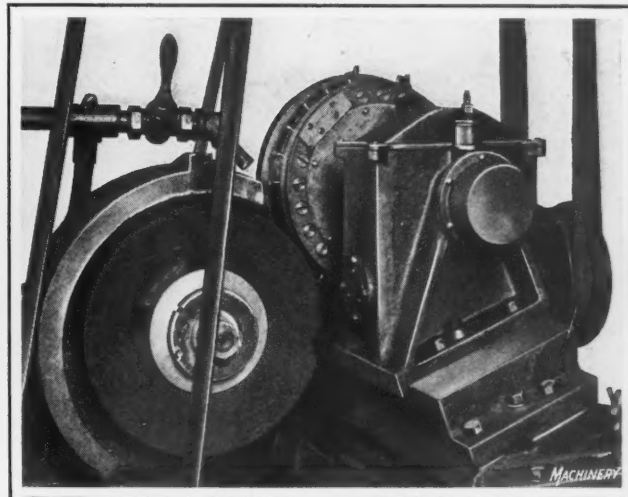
Grinding Machine equipped with a Rotary Fixture that carries the Roller Pins between the Wheels
